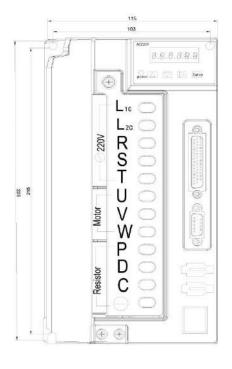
DZ-50B2-J, DZ-75B2-J series side installation dimension
